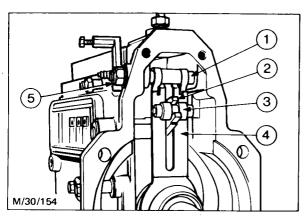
Governor Spring Assembly (Naturally Aspirated)
